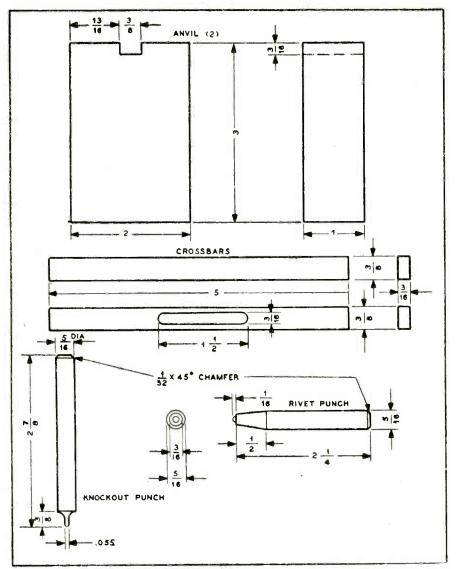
Jig details for replacing conact spring assemblies in Philco 8-position turret tuners.
